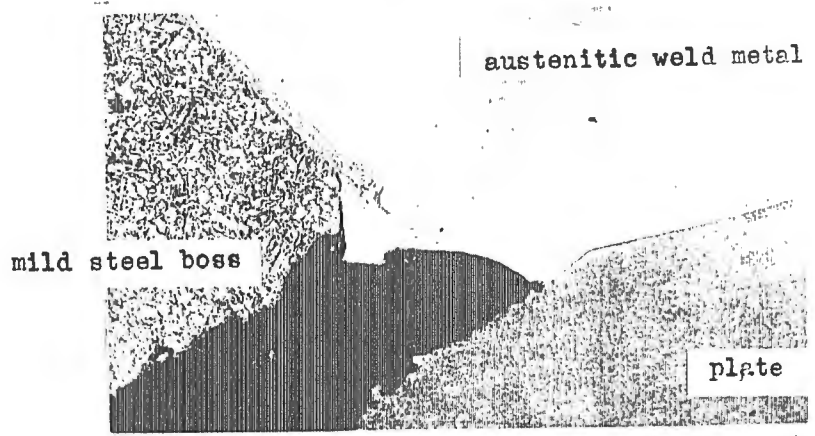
Macroetched Transverse Sections Through Weld Joints in German PzKw IV Tank
